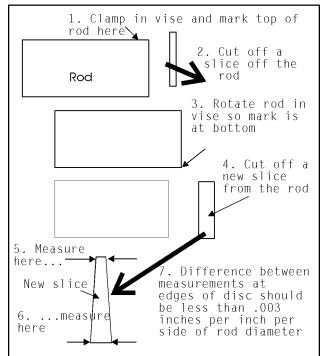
Step-by-step method to produce a test disc which can be measured for "wedge" - a measurement for testing cutting accuracy.
